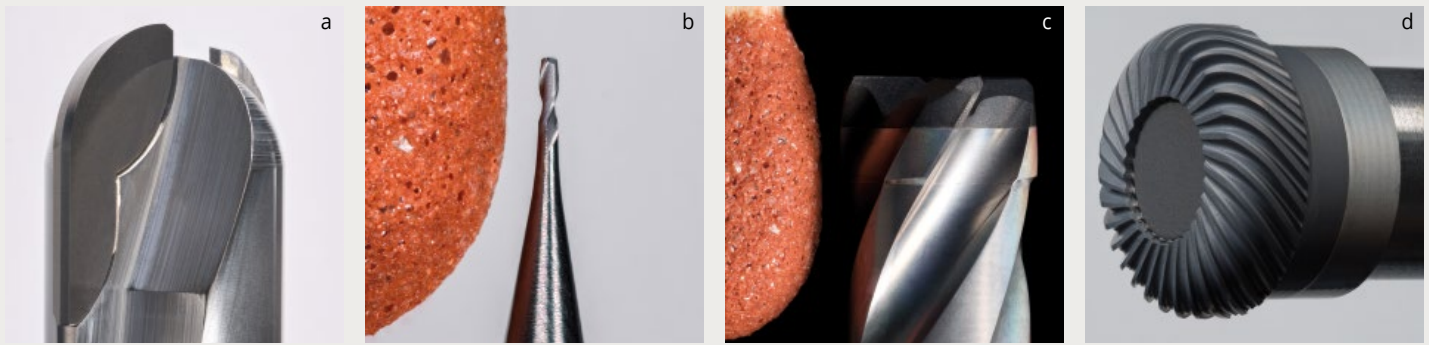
Typical examples of tool geometries. Brazed PCD ball nose end mill (a), micro tungsten carbide 2-flute end mill ($\varnothing = 0.2$ mm) (b), micro PCD 4-flute end mill ($\varnothing = 3$ mm) (c), PCD torus end mill used for milling graphite molds for mobile phone displays (d; sources: Ewag AG)
